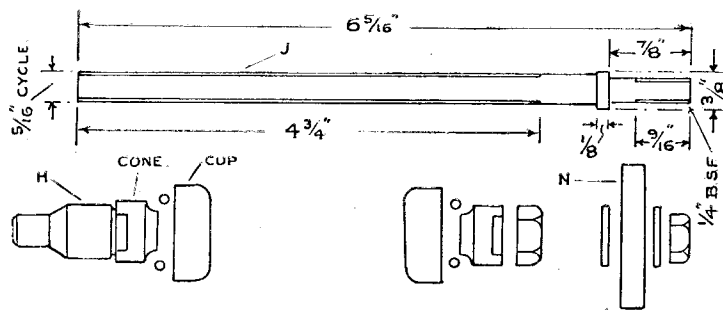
DRIVEN SPINDLE ASSEMBLY.
